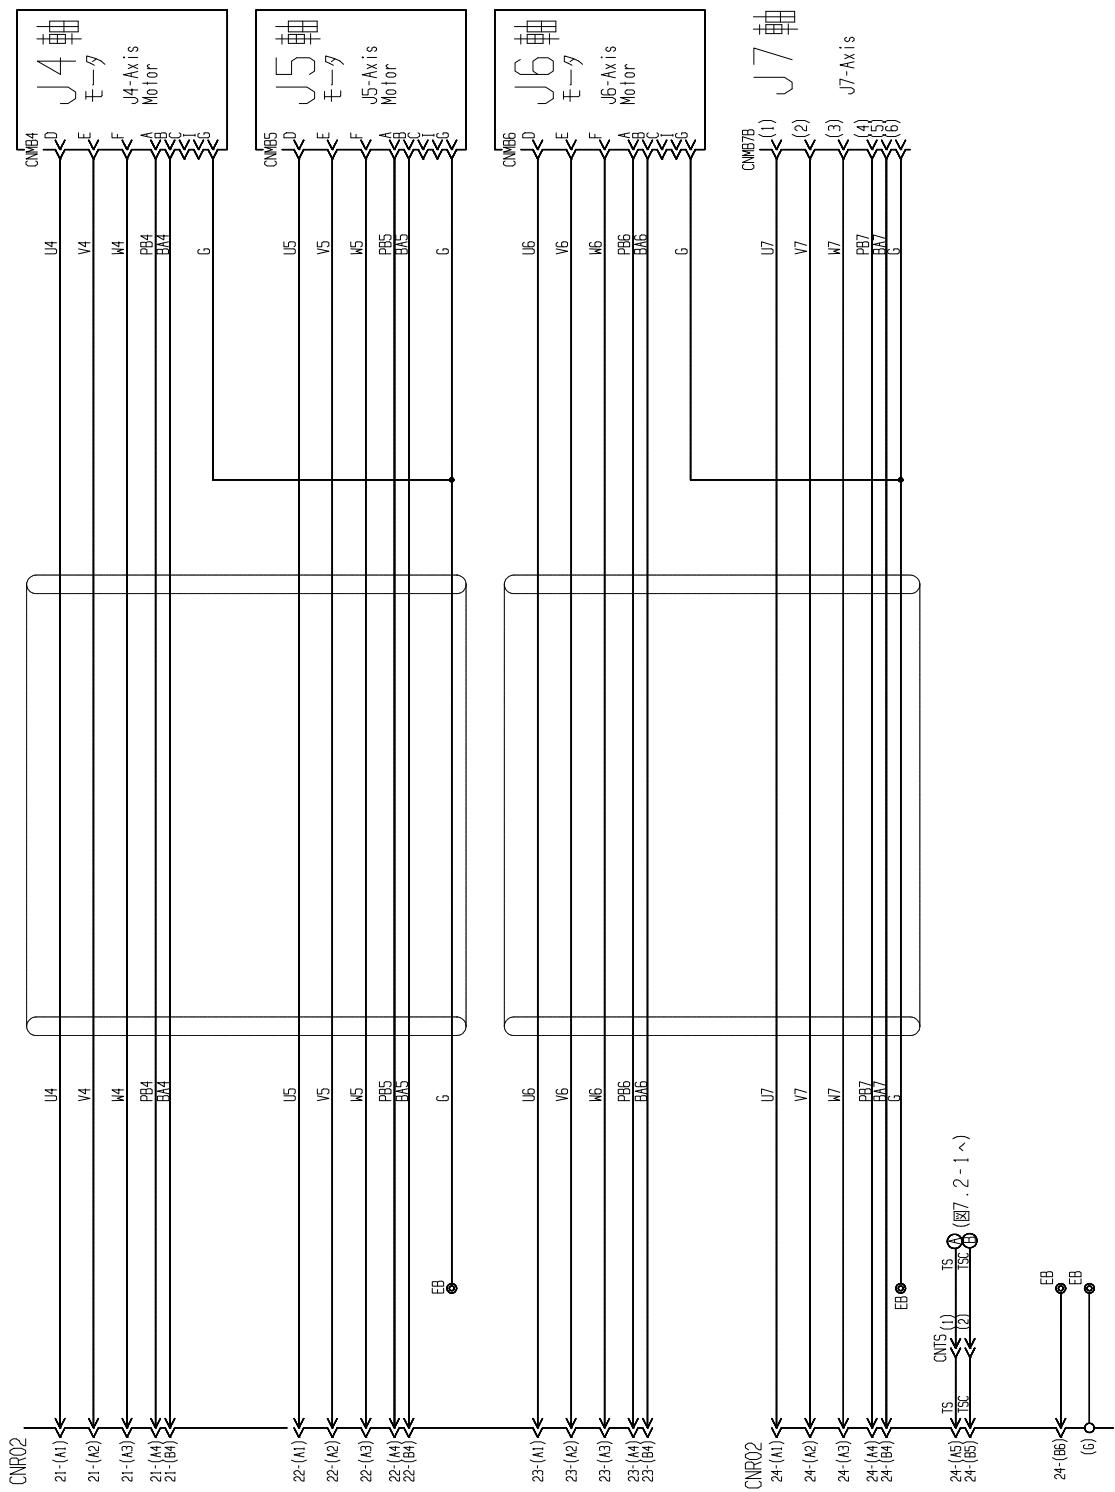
Wire Connection Diagram for Motor and Brake 2
